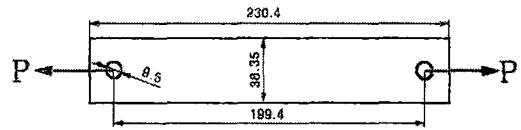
Dimensions of a rectangular cross-section tensile plate specimen
